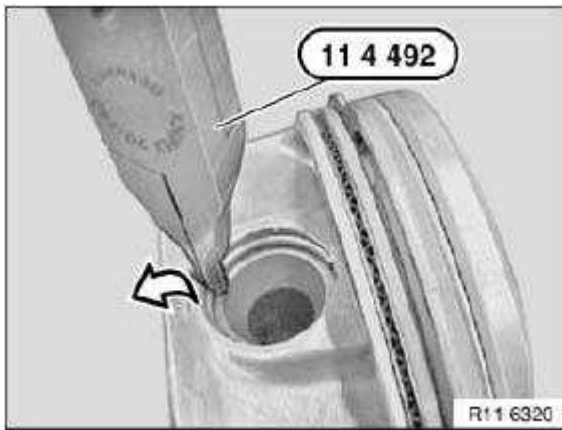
Removing Piston Pin Circlip With Special Tool (11 4 492)
